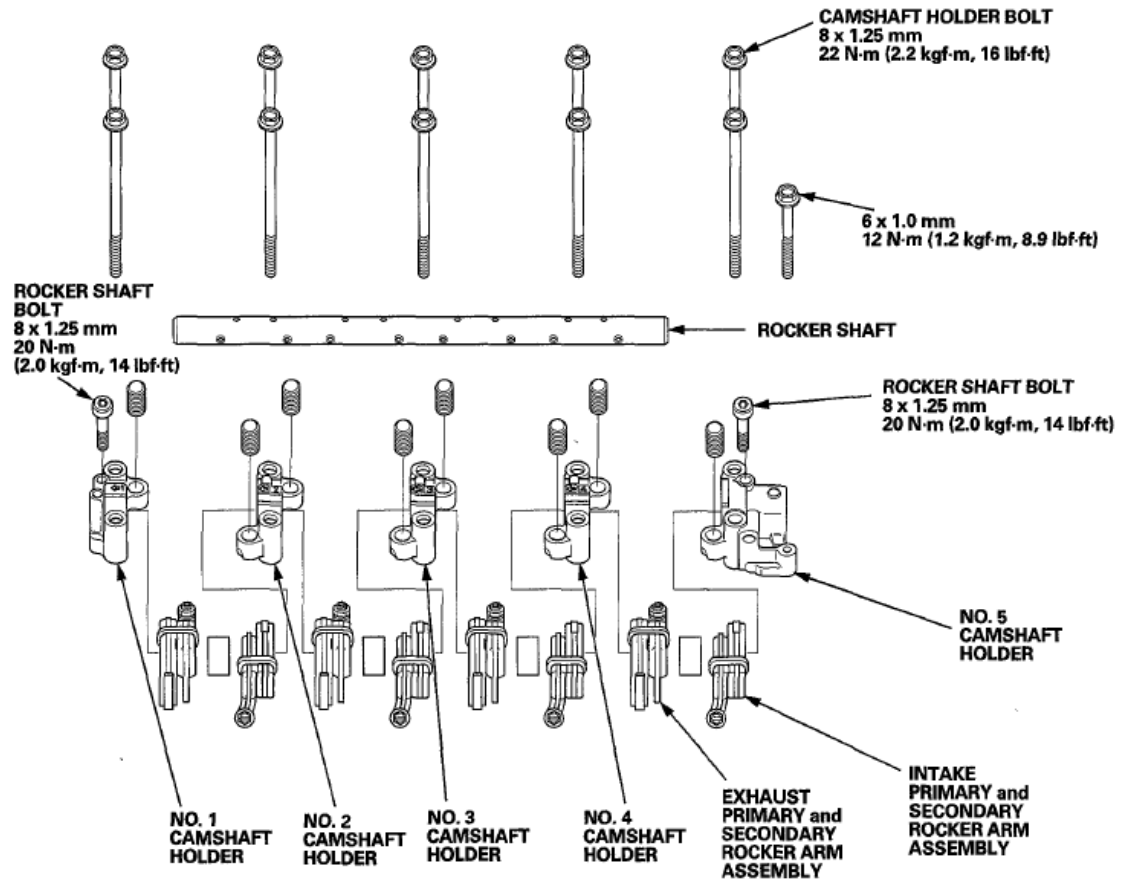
Identifying Rocker Arm Assembly With Bolts
